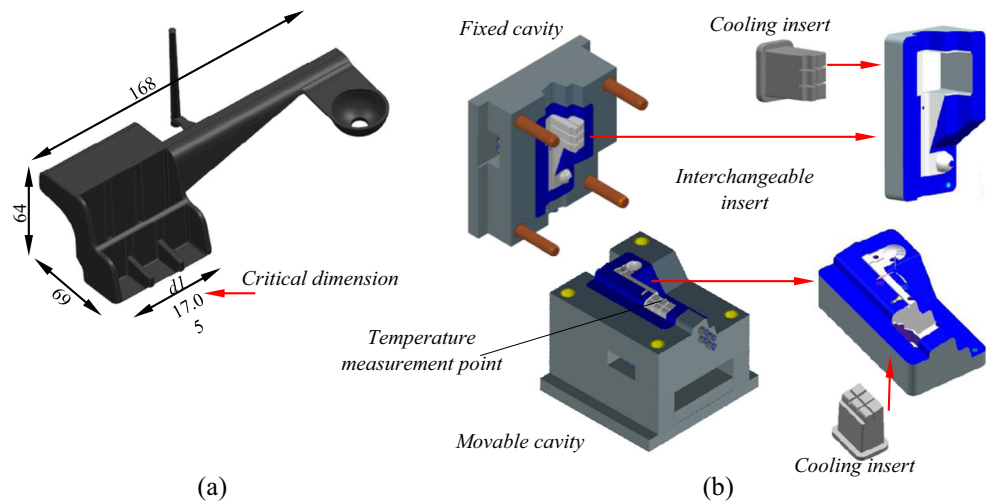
CAD designs for a workpiece and critical dimension d_1 and b modular mold and inserts
